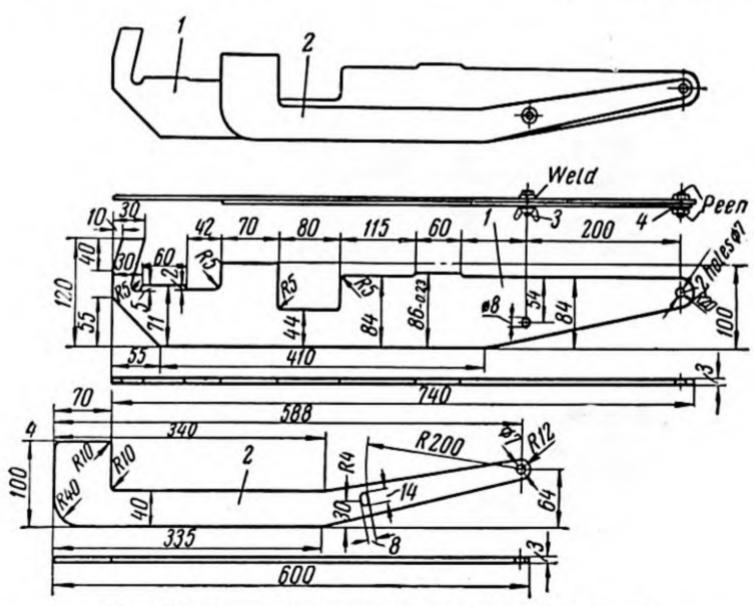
Template for actuating linkage adjustment: 1—template, 2—indicator of template, 3—M7 wing nut; 4—M6 nut
